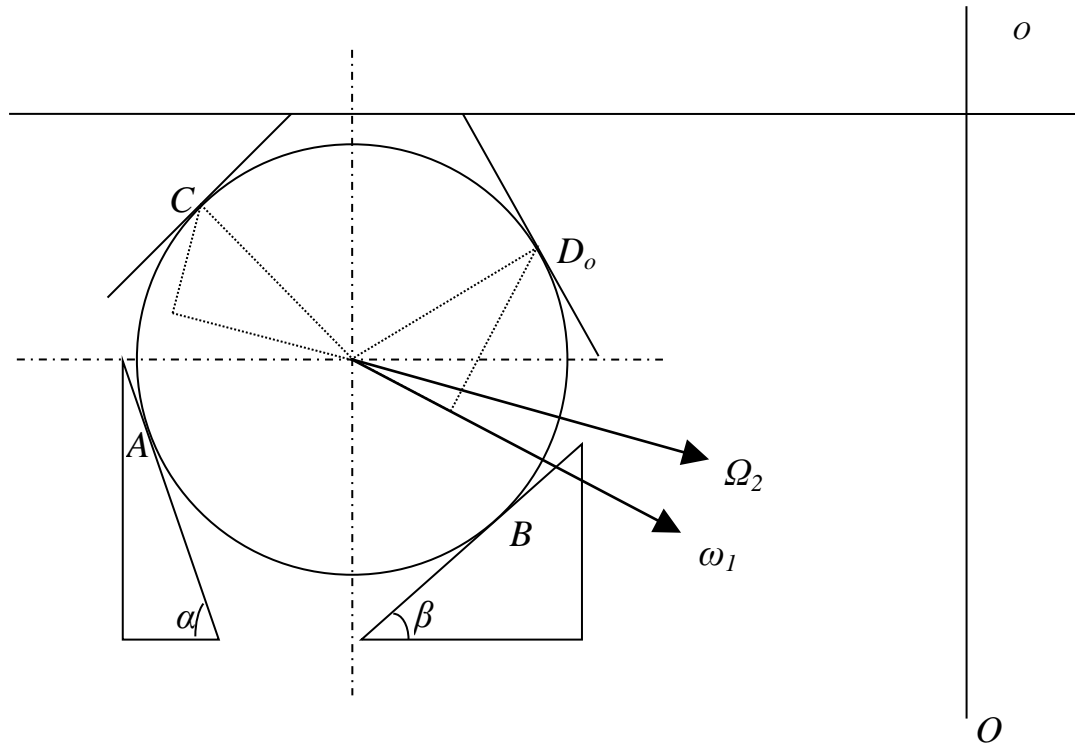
Contact traces for the twin V-groove grinding mechanism at contact points C and D
